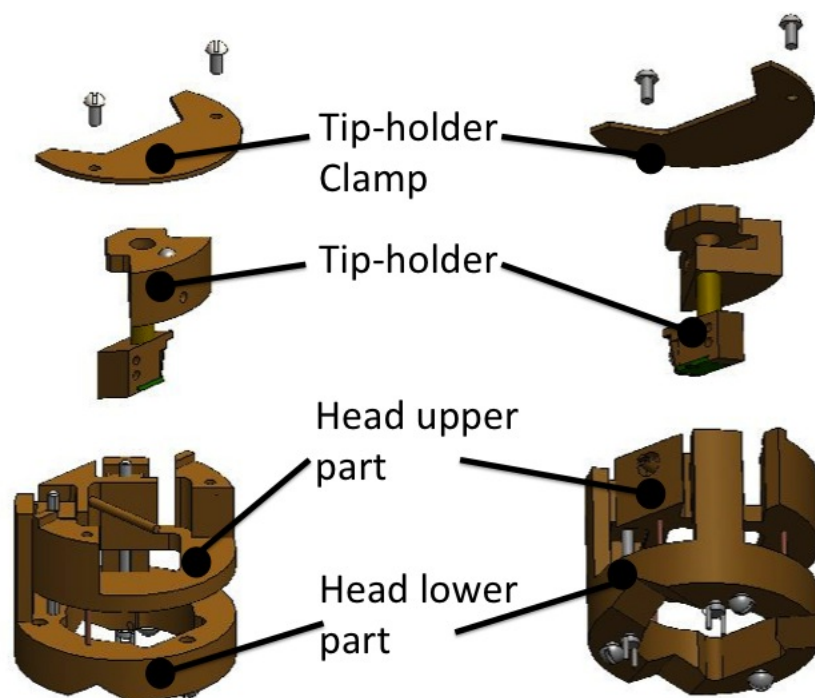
Exploded view of the head assembly. A clamp is screwed on top of the assembly that holds the tip holder in place. The tip holder has a press fit ball bearing on top and gets clamped on top of the upper head.
